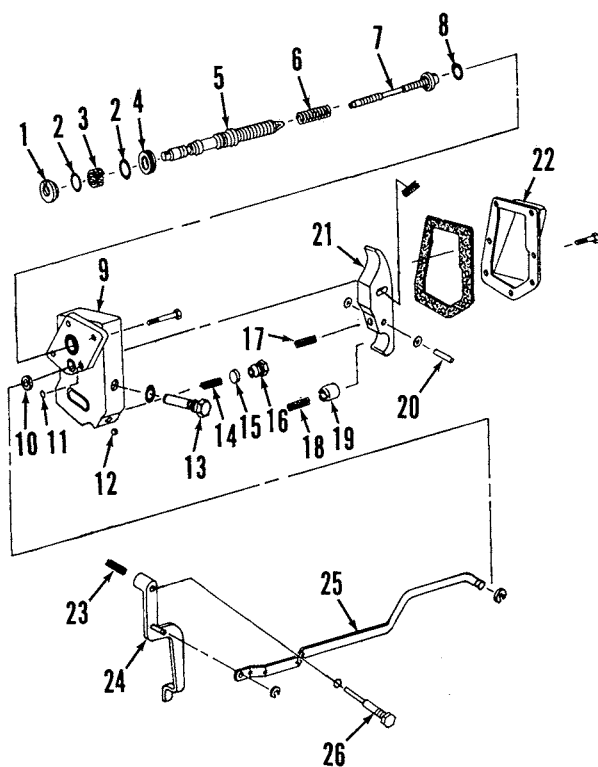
Exploded view of load control valve housing showing component parts used on Models 4050, 4250 and 4450.
